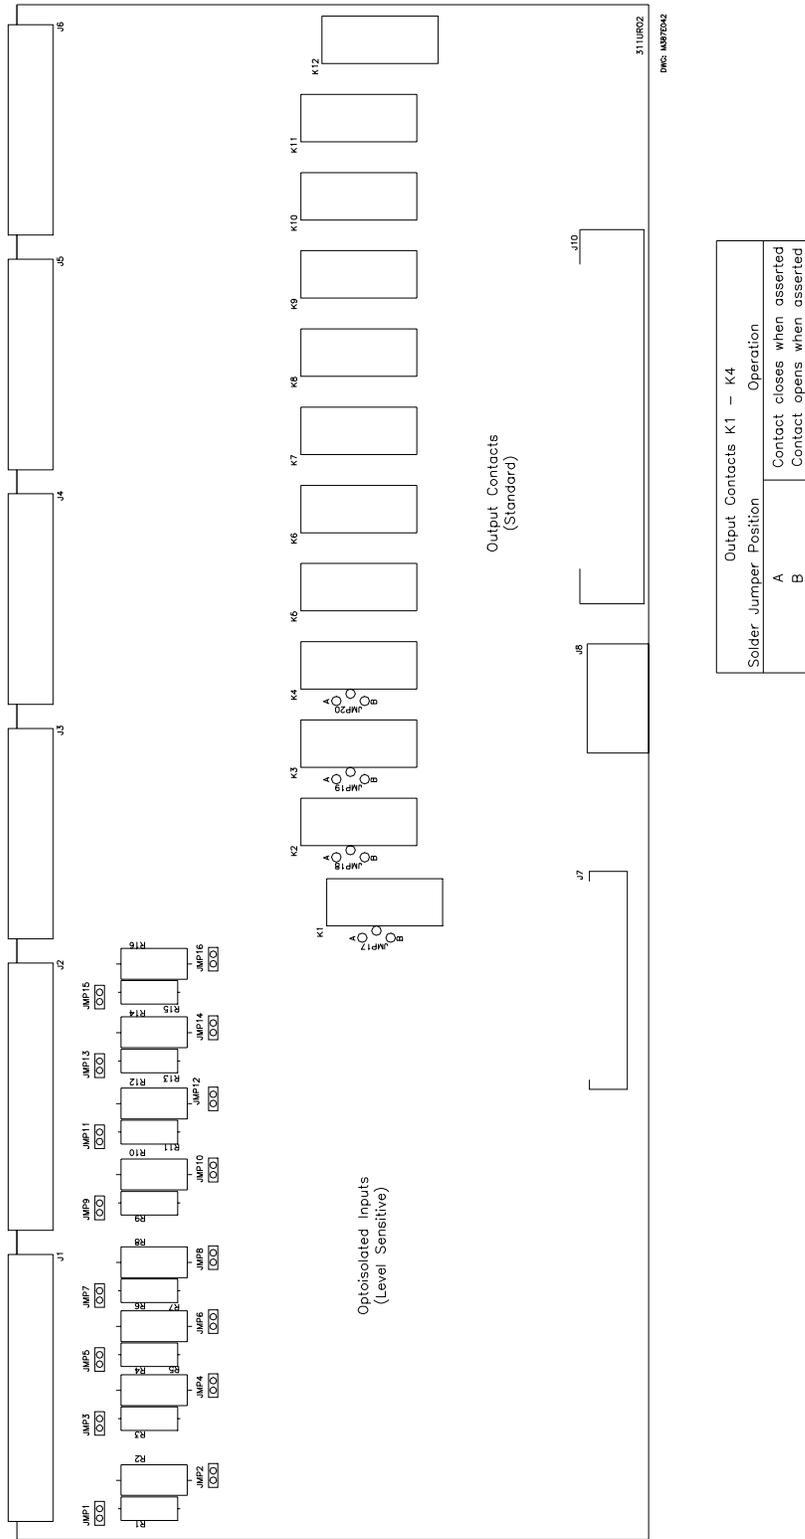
Interface Board 4 Component Layout (Conventional Terminal Block)
